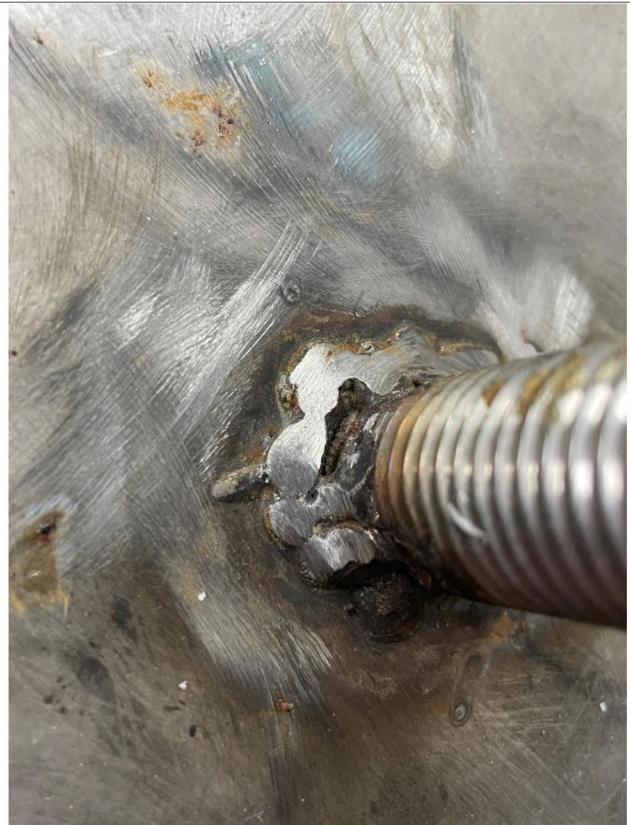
Intact Section as-received showing discolouration due to heat input from welding
